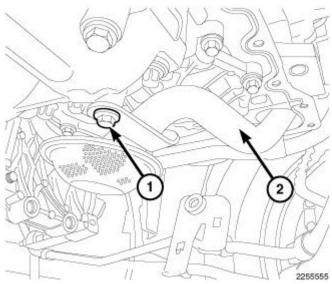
Oil Pickup Tube With Bolt Courtesy of CHRYSLER LLC
